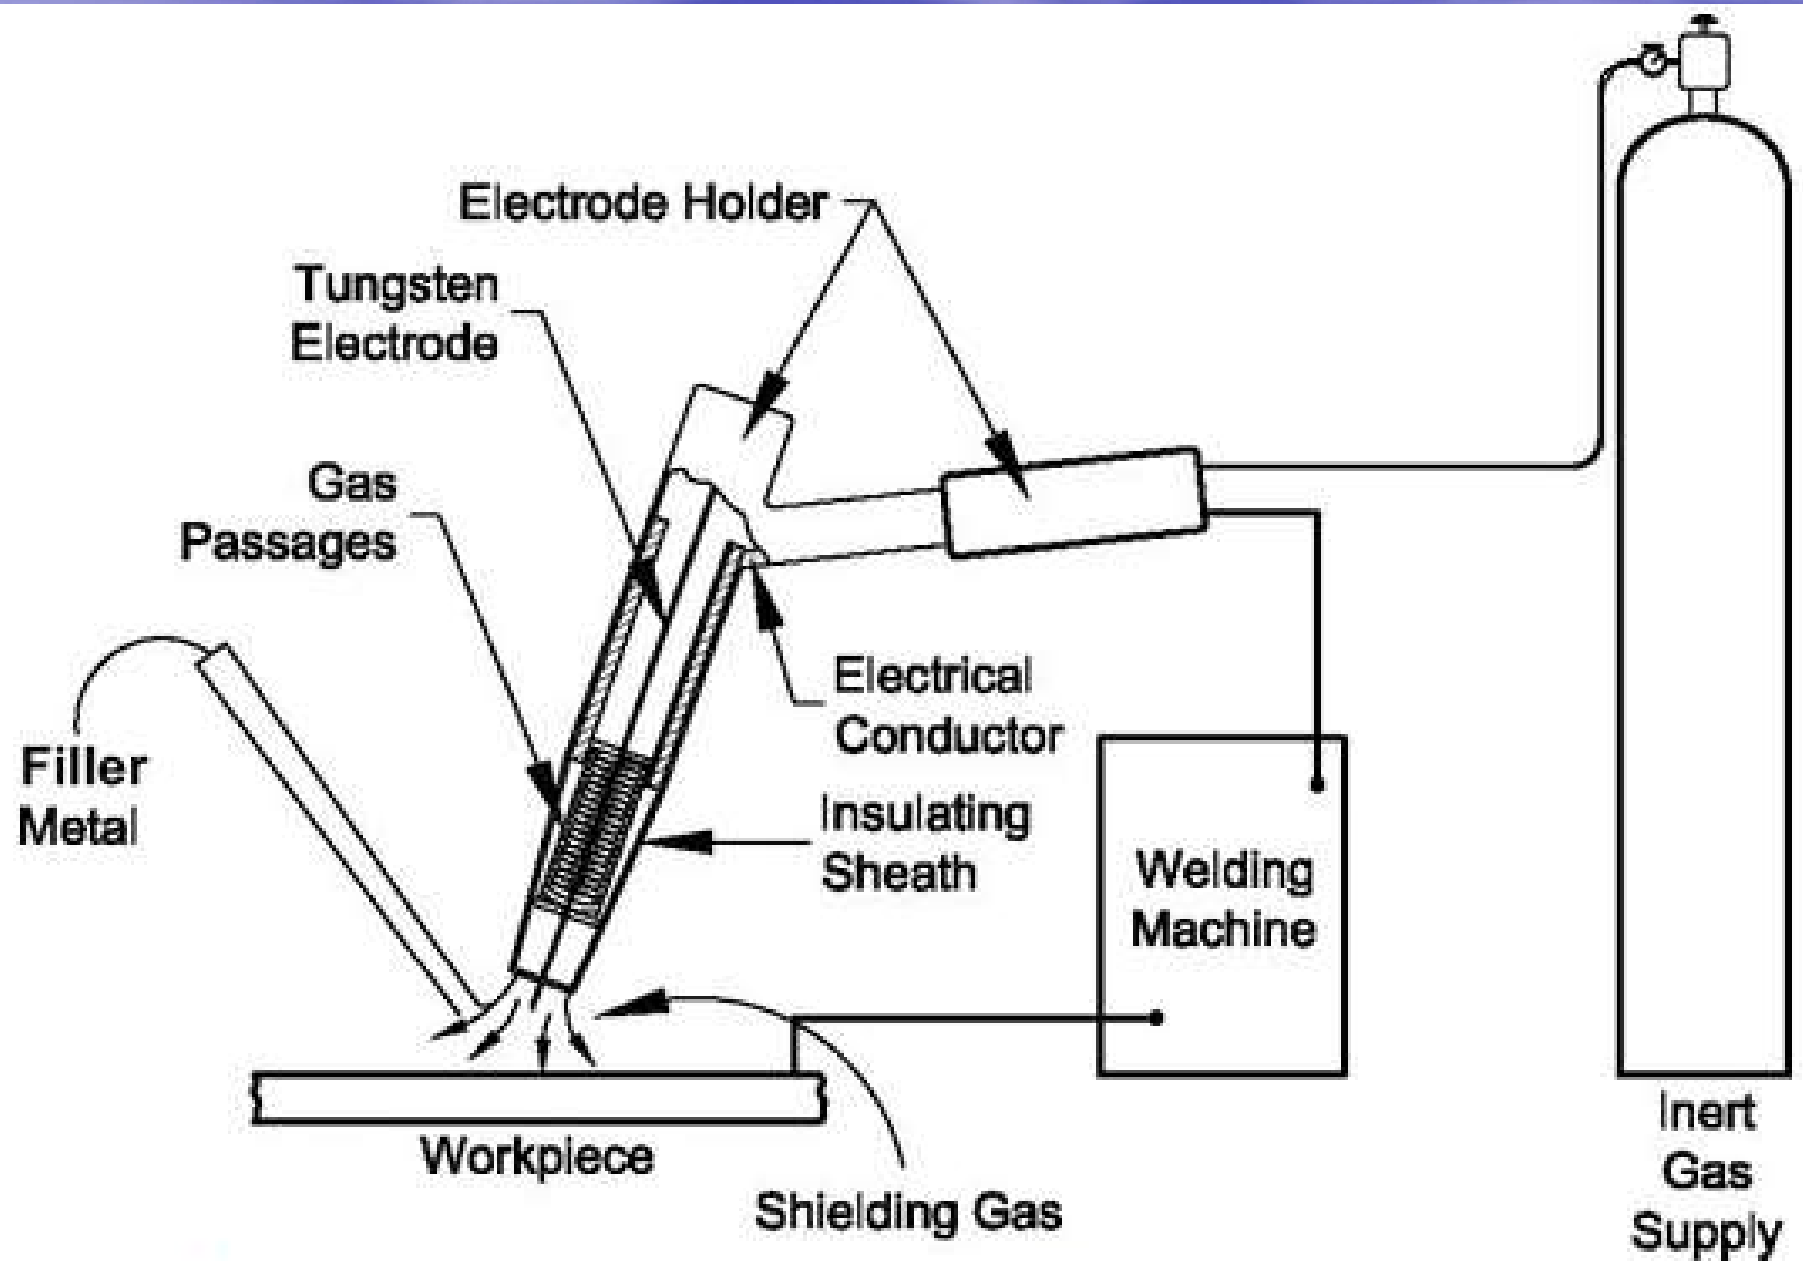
Equipment for a gas tungsten arc welding (GTAW).
